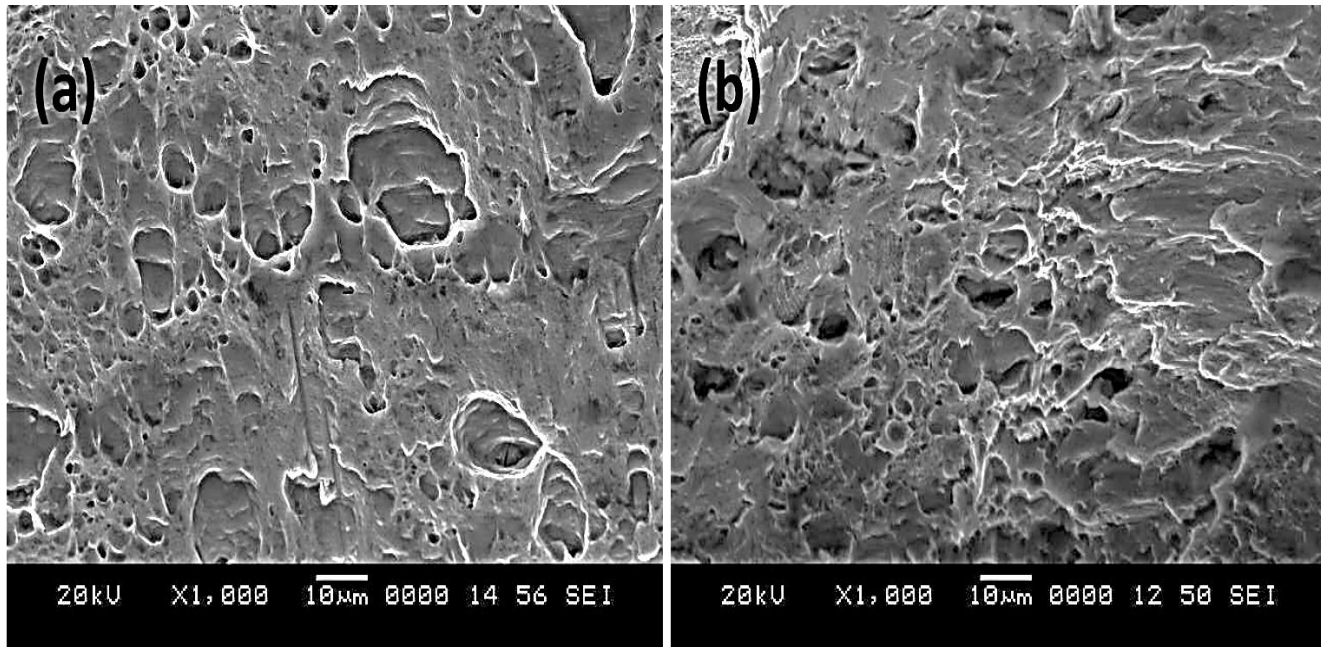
Fractography of fractured specimen in FSWed A6061-T6 and A6082-T6 joint
